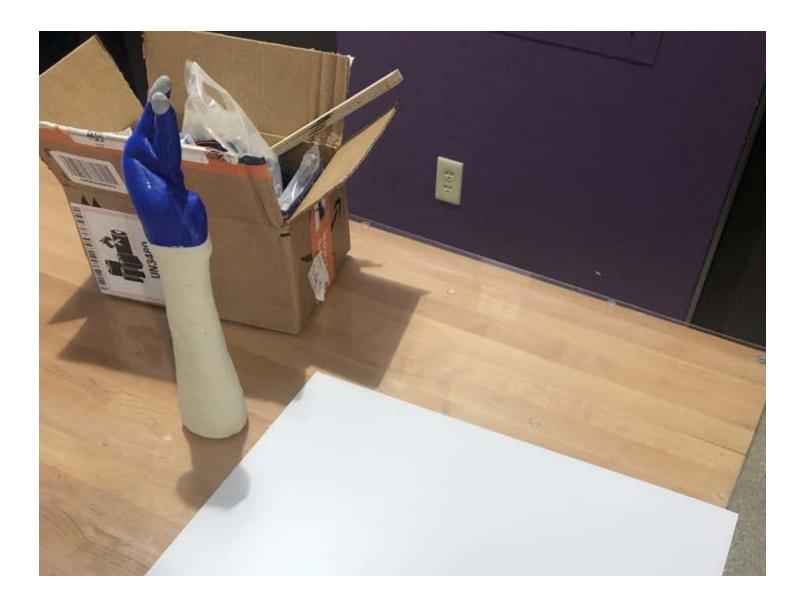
The forearm mold pictured next to the sheet of polystyrene plastic used to mold the cuff.
